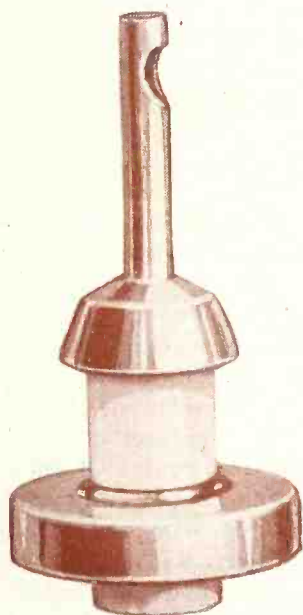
Ceramic bushing for hermetic solder sealing to metal cover plates.
